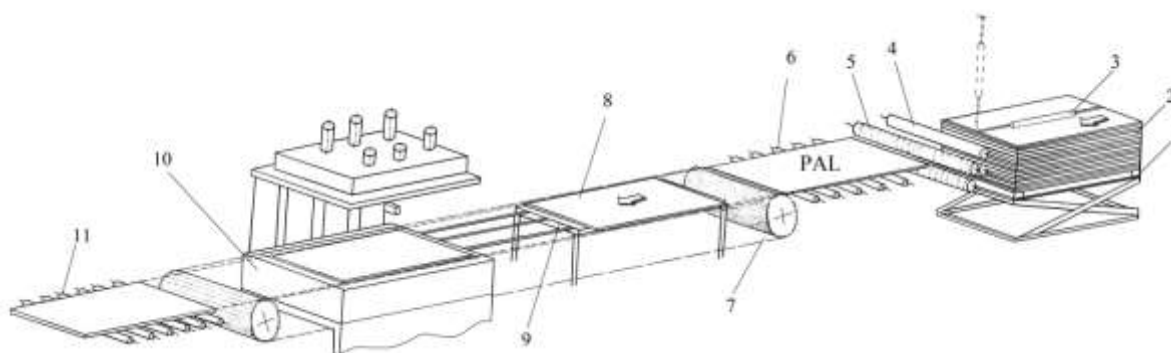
Line equipped with single daylight press for plating the chipboards with aluminum foil: 1-vertical moving platform; 2-chipboard; 3-pusher device; 4-advance cylinders; 5-brushing cylinders; 6-roller conveyor; 7-chain conveyer; 8-composite package; 9-platform for the forming of the packages; 10- single daylight press; 11- roller conveyor.
